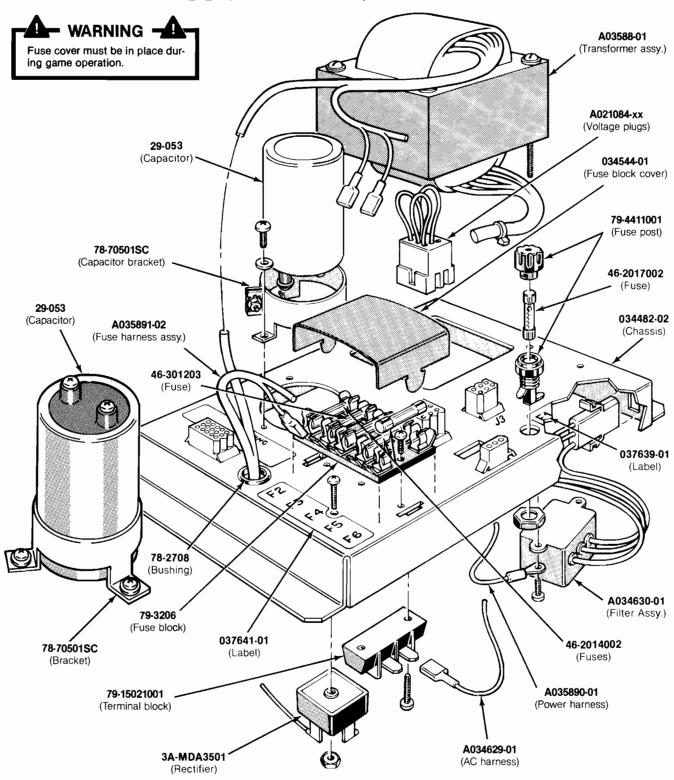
Power Supply Assembly A037671-04 & -05 G
